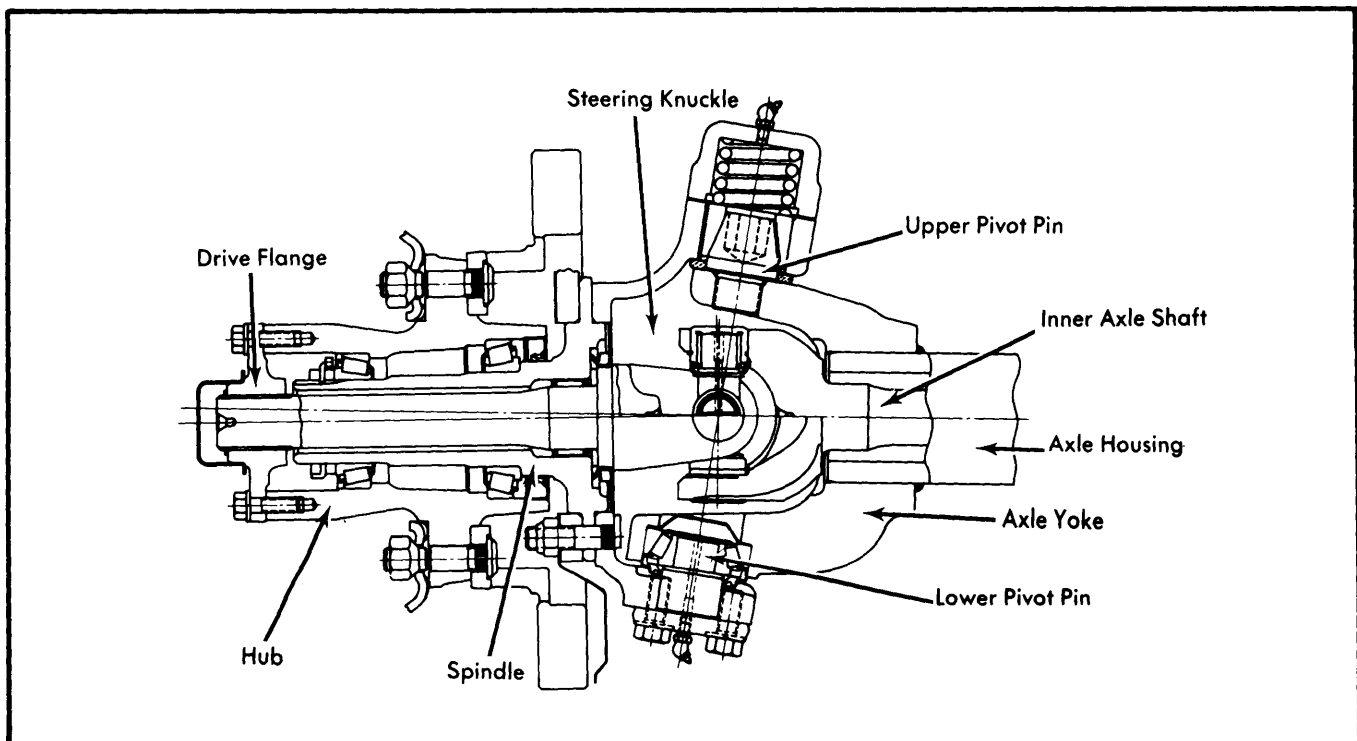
Sectional View of Pivot Pin Type Steering Knuckle Assembly
